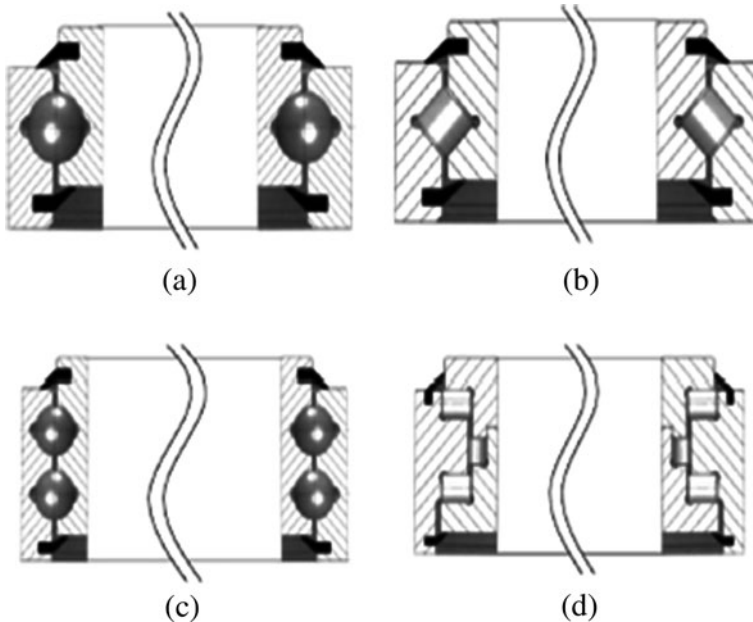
Different types of slewing bearings a four-contact-point single row ball bearing, b crossed cylindrical roller bearing, c four-contact-point-double row ball bearing, and d three-row cylindrical roller bearing, from [83]
